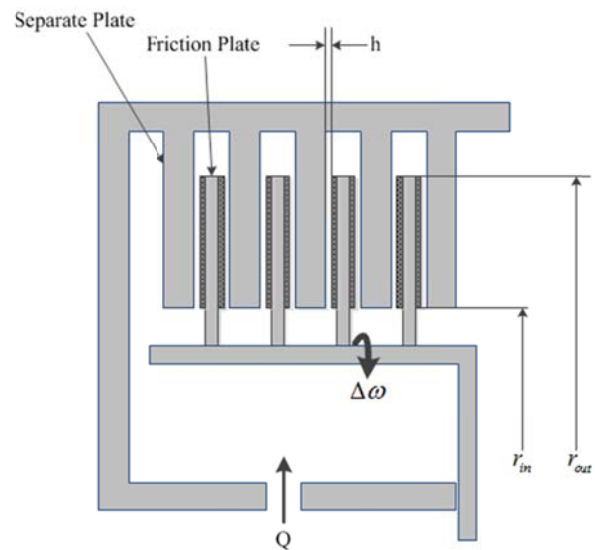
The schematic of disengaged clutch pack in wet DCT
